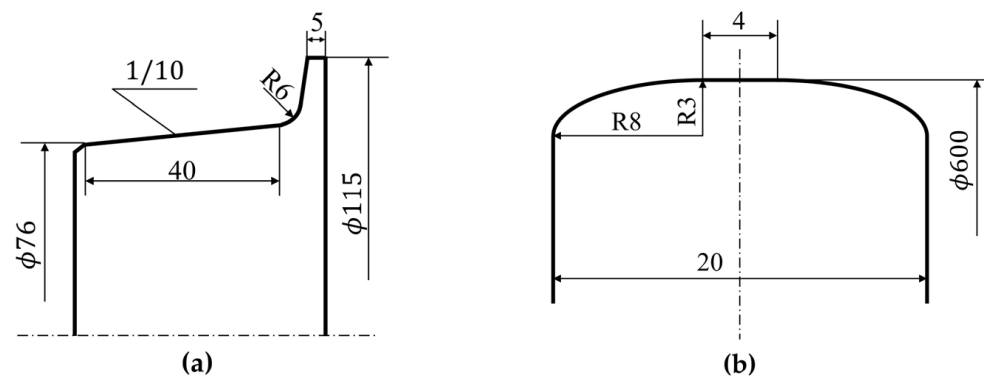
The profile design for the experiments. (a) Wheel tread; (b) roller surface.
